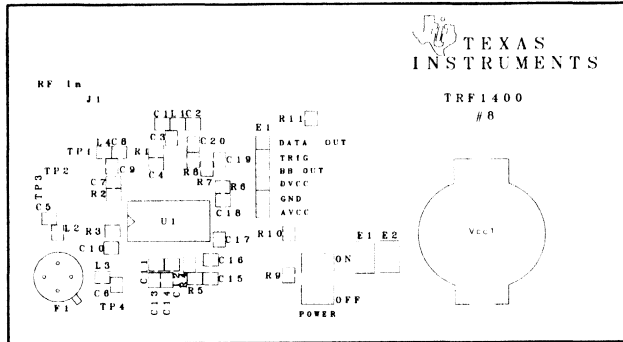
TRF1400 Receiver Test Circuit, Board Silk Screen
